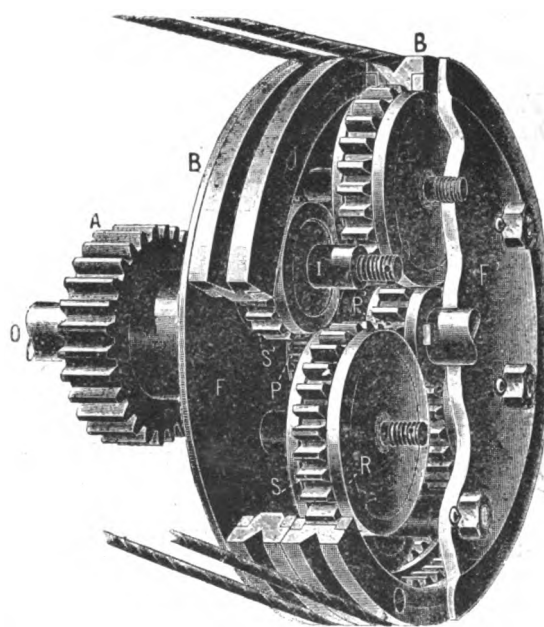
SECTIONAL VIEW OF VARIABLE-SPEED GEAR "STELLA" VOITURETTE.
